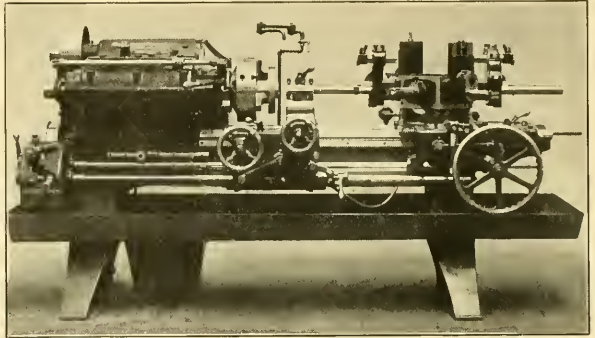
UNIVERSAL HOLLOW HEXAGON TURRET LATHE EXHIBITED BY WARNER AND SWASEY CO.
